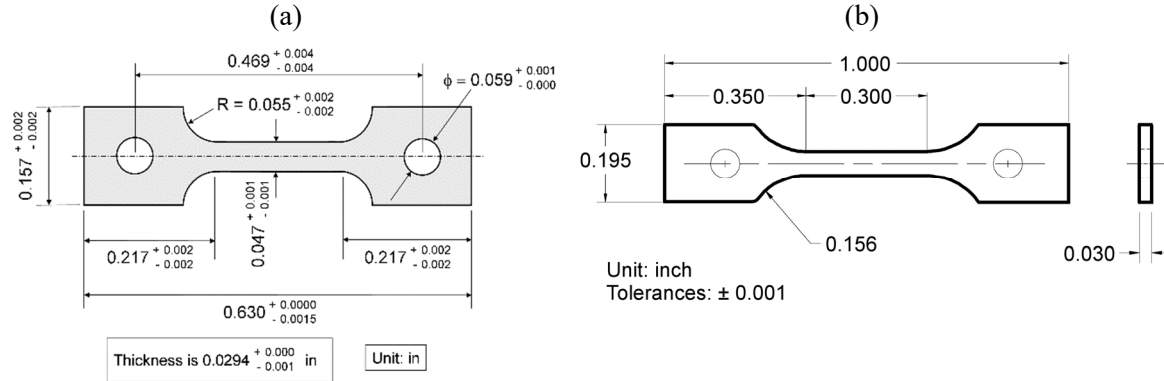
Dimensions of the (a) SS-J3 and (b) SS-3 flat specimens used in the tensile tests.
